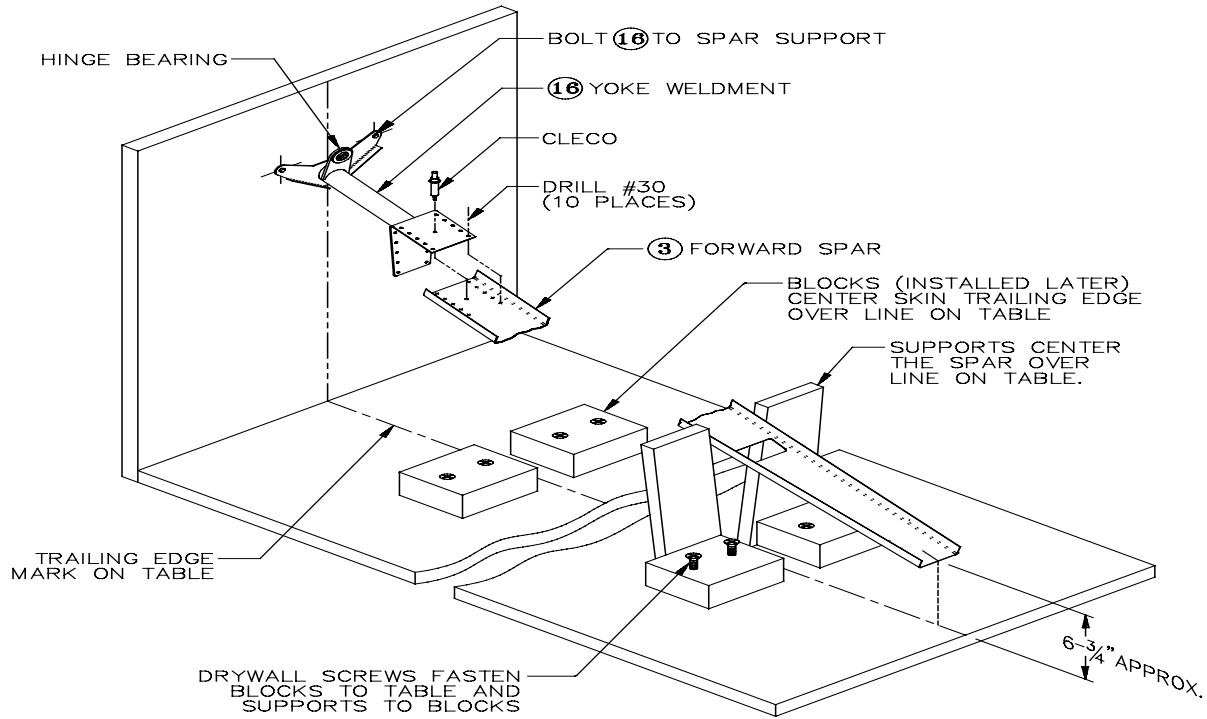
Forward Spar/Yoke Weldment Assembly
